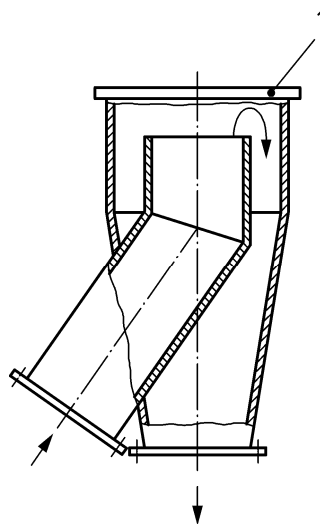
Details of the pipe-in-pipe explosion diverters
